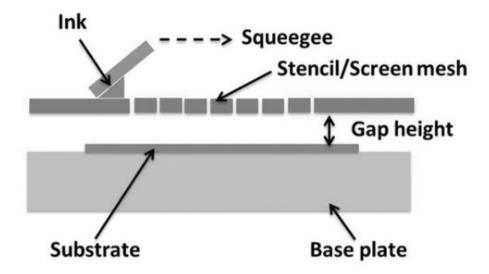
An illustration of screen-printing equipment. The PET film, i.e. the substrate, is placed on the base plate. The silver ink is printed onto the PET film by pressing it through the stencil using a squeegee. Picture from [11].
